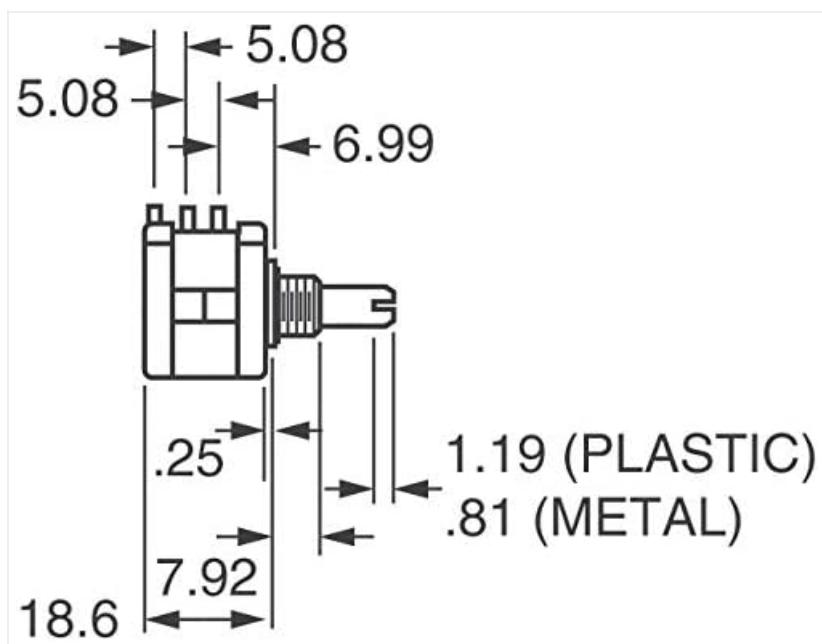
Technical drawing illustrating key dimensions of the potentiometer.
